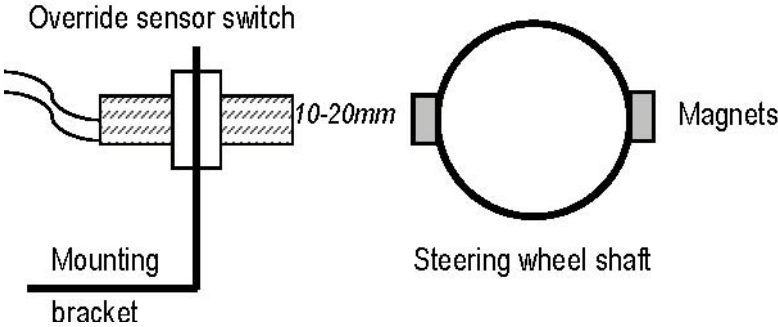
Schematic layout of the Auto-steer override sensor switch installation
